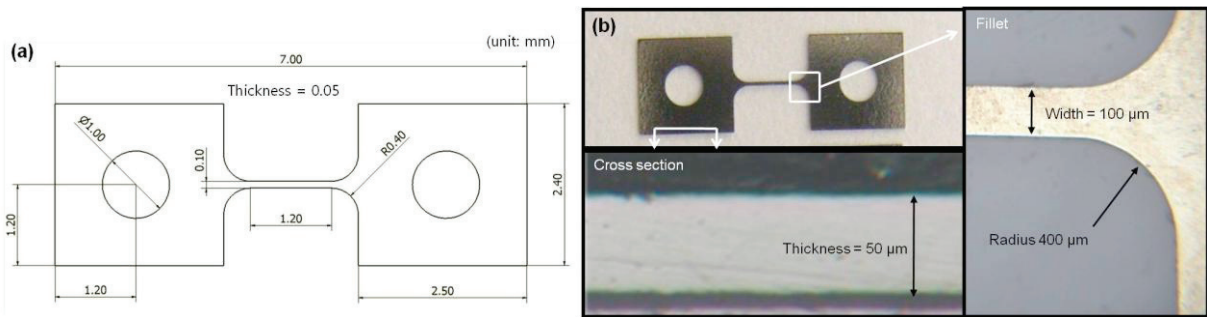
(a) A drawing of the specimen design; (b) microscopic images of the electrodeposited nickel specimens
